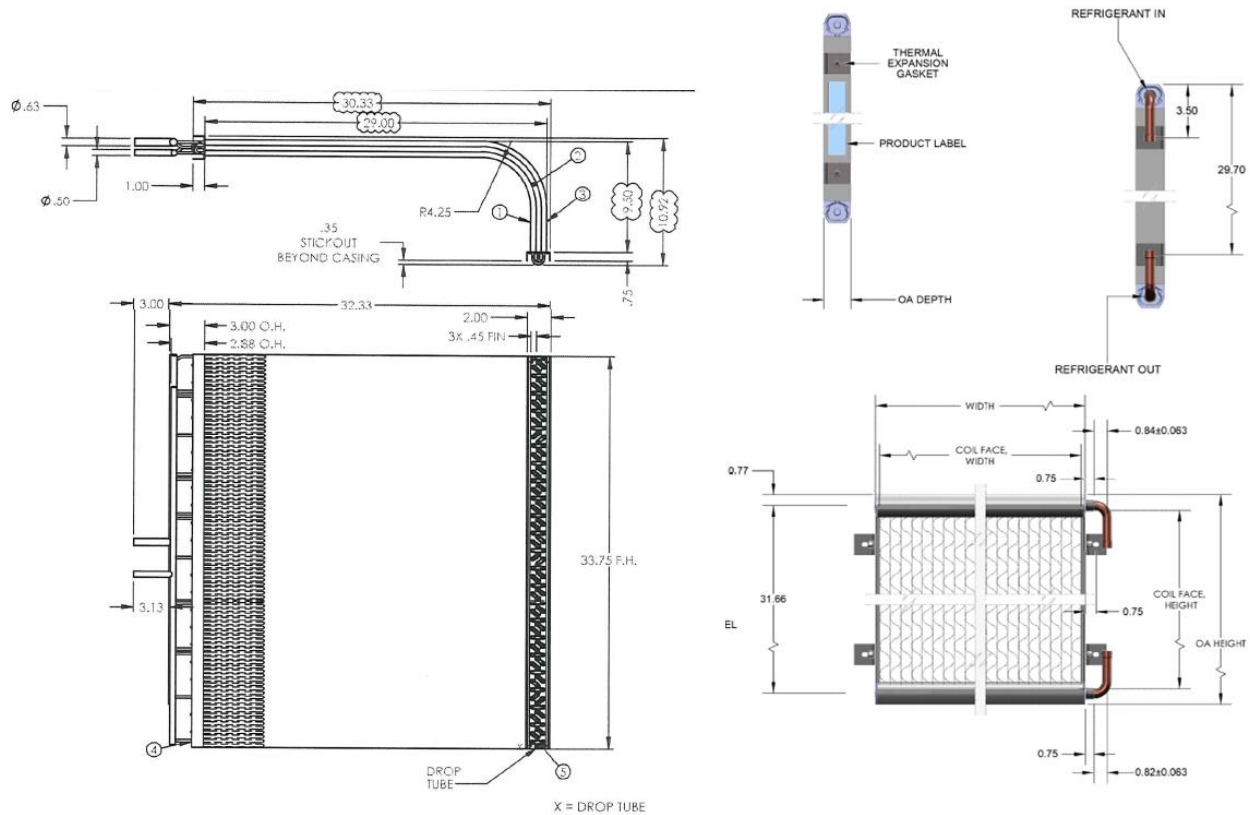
HX Form Examples: L-shape (left), Flat (right).
